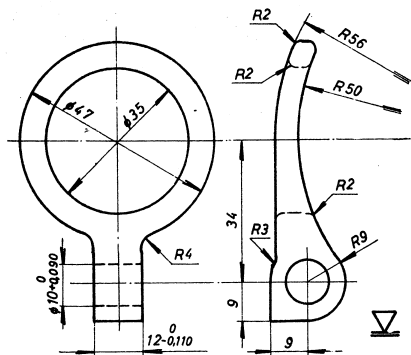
BARREL BORE ILLUMINATING EQUIPMENT
